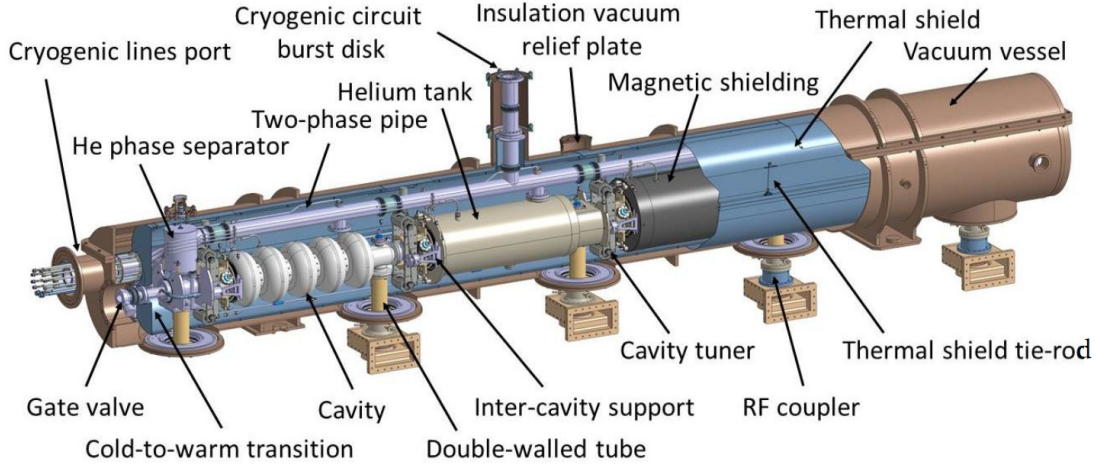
General assembly view of the SPL cryomodule considered to be adapted for PERLE.
